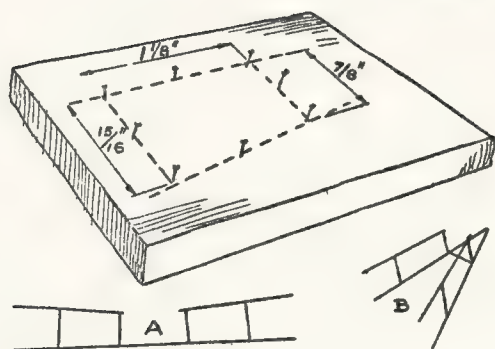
The tail-boom jig, showing dimensions and method of bending the complete assembly to shape
